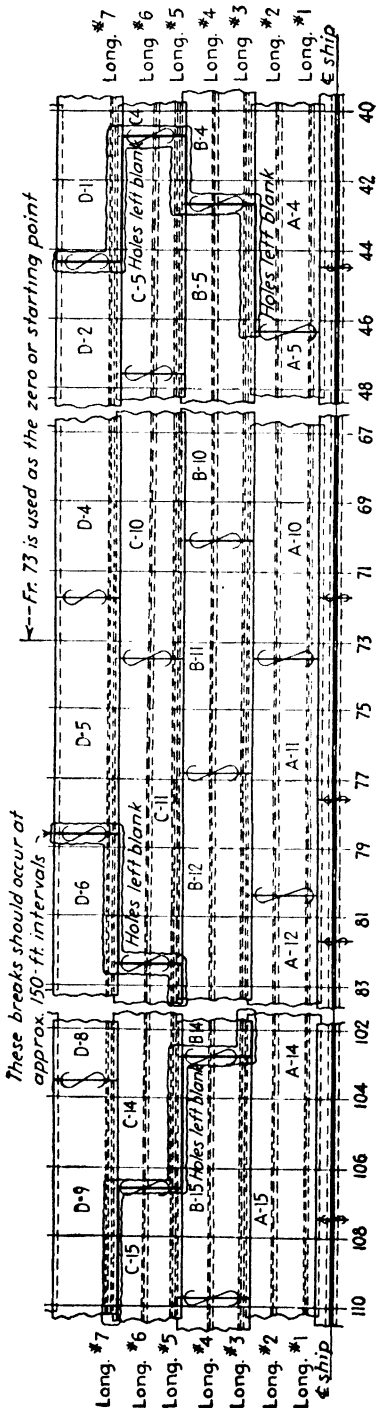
Bottom shell plating with holes left blank for adjustment.
